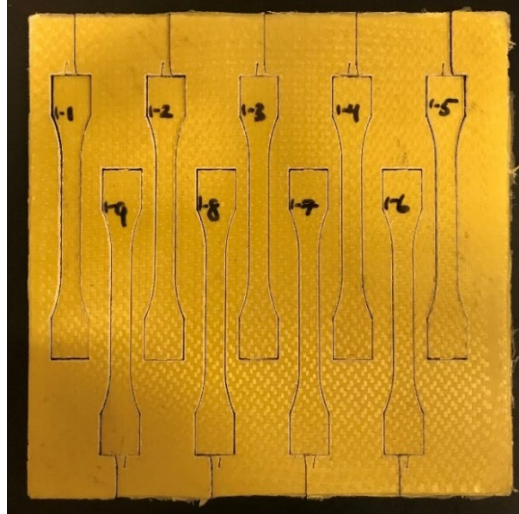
Dog-bone tensile samples after being cut by the waterjet with dimensions following ASTM D638-14
